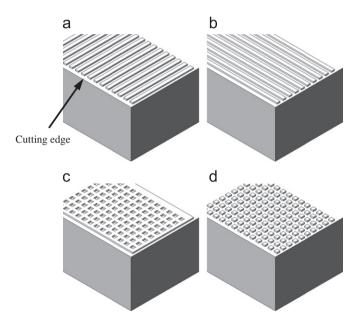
Four types of micro-texture fabricated at the flat rake face: (a) perpendicular; (b) parallel; (c) pit and (d) dot.
